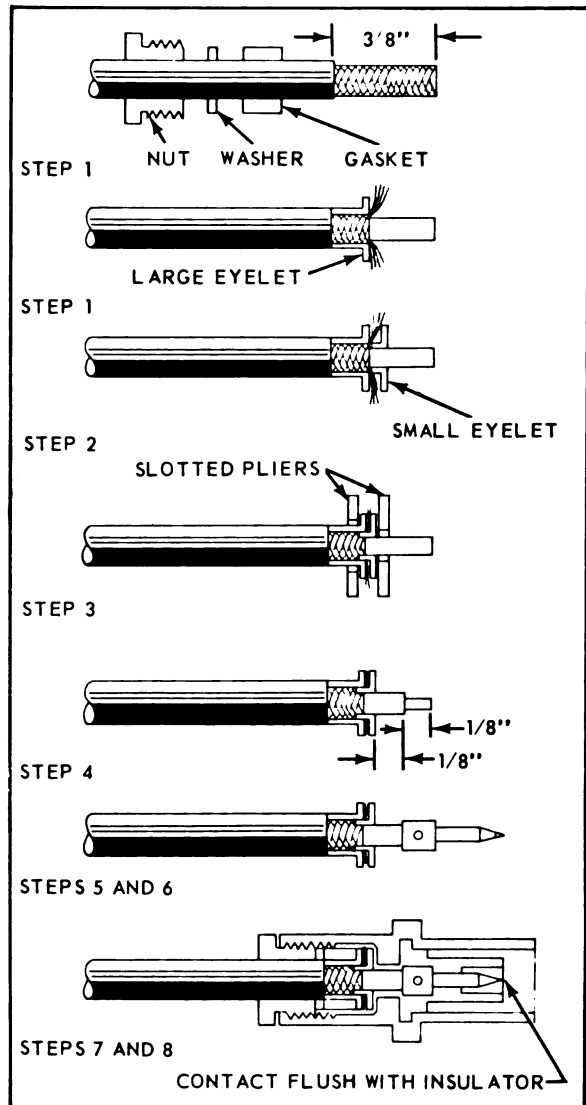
Attaching Liquidometer 9100 Series Connectors to Coaxial Cable
